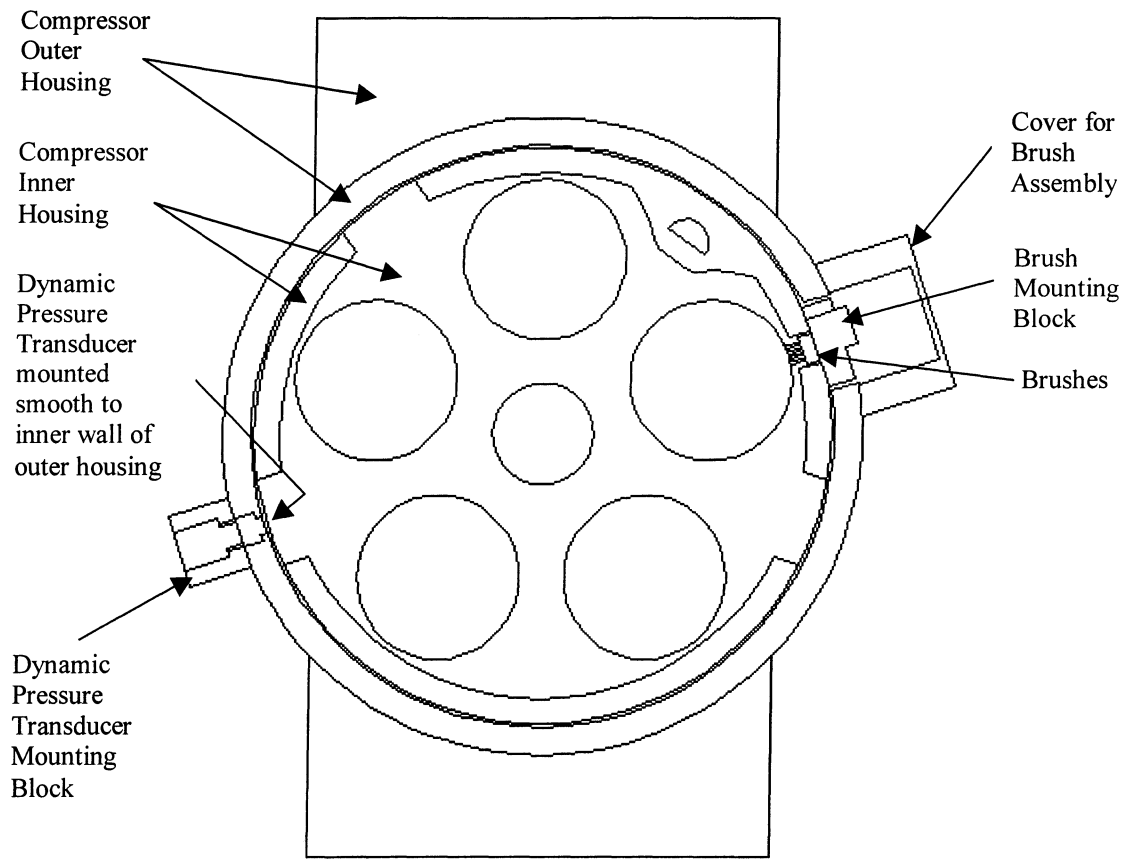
Dynamic pressure transducer mounting block location on the compressor housing
